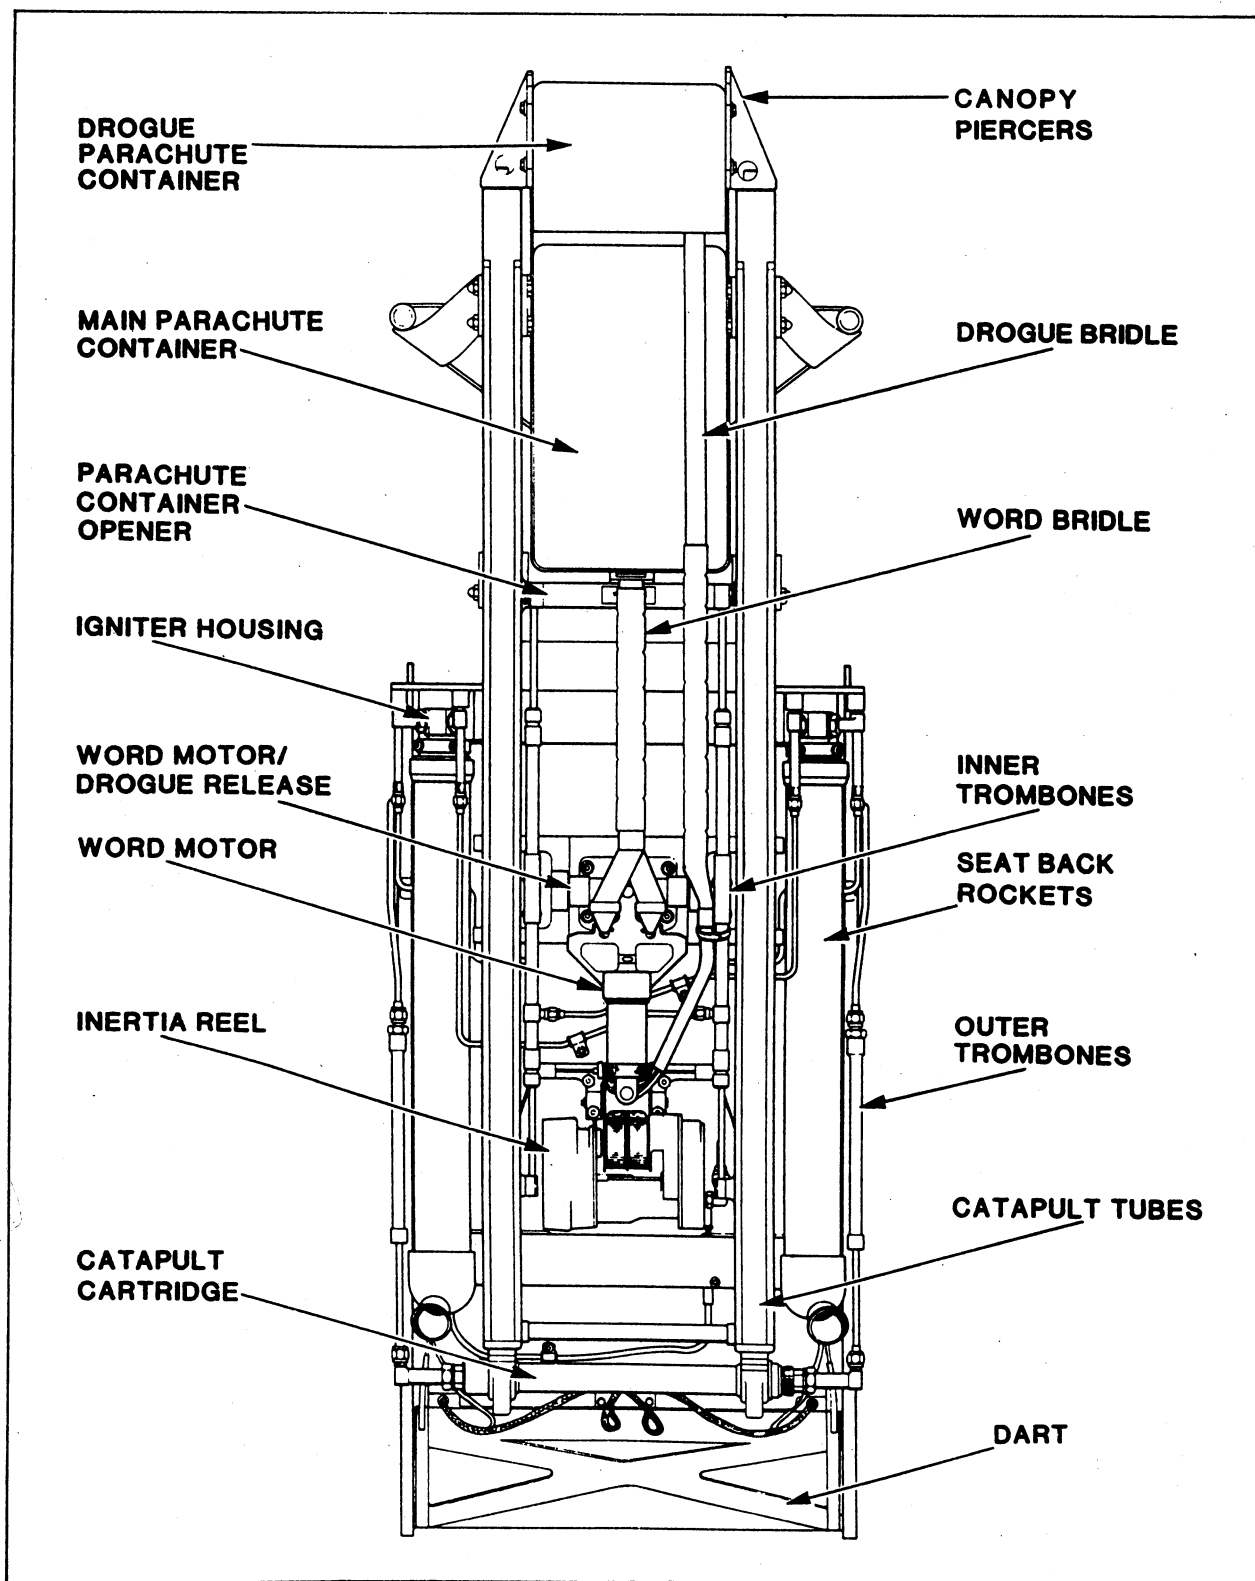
SJU-8/A ejection seat assembly (back view).
